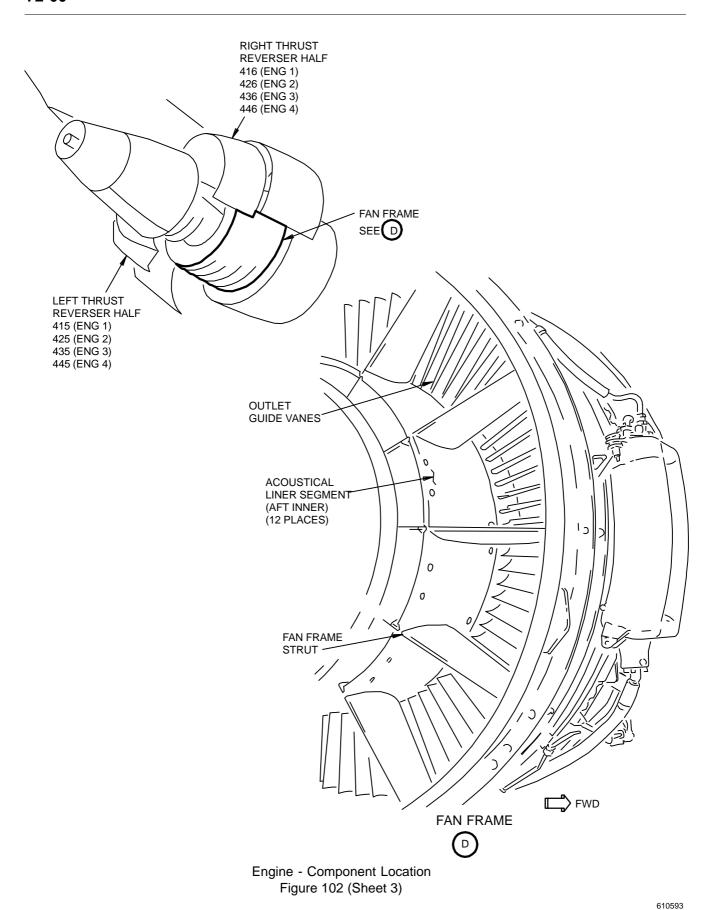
72-00 Engine Component Location Fig. 102 (Sheet 3)
